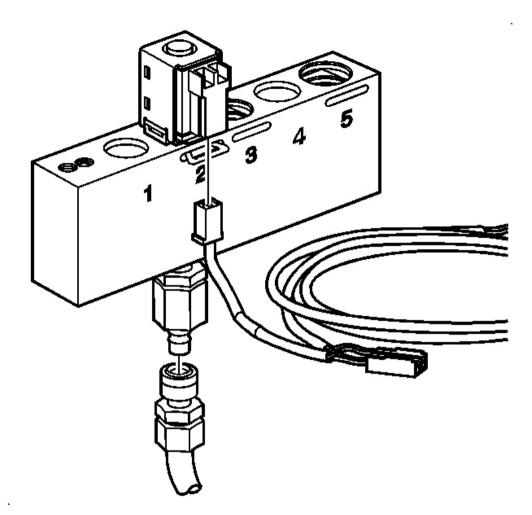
Connecting The Solenoid Testing Harness To The Solenoid Courtesy of GENERAL MOTORS CORP.
